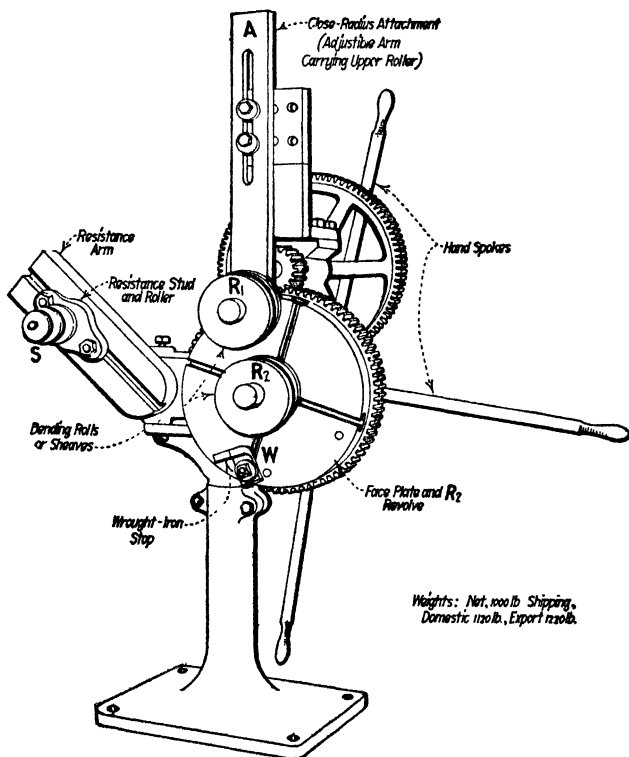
Pedrick bending machine set up for making short radii bends. *W* is a stop to hold the conduit end in place.
